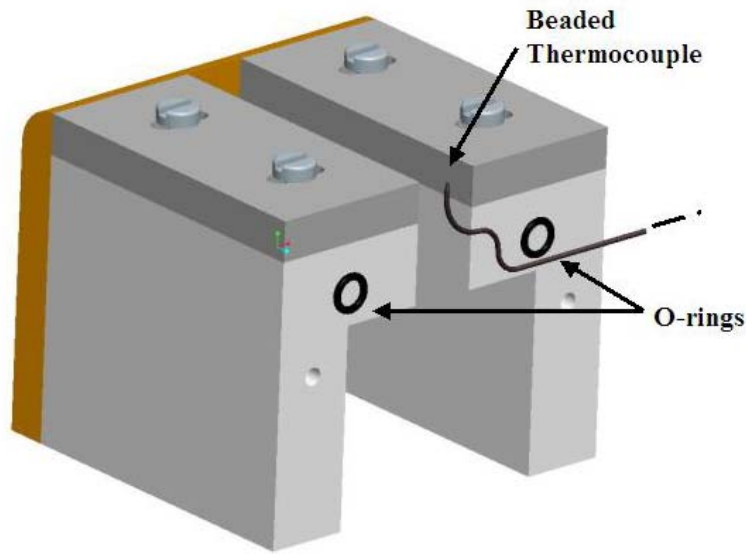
A solid model showing placement of O-rings and beaded thermocouple.
